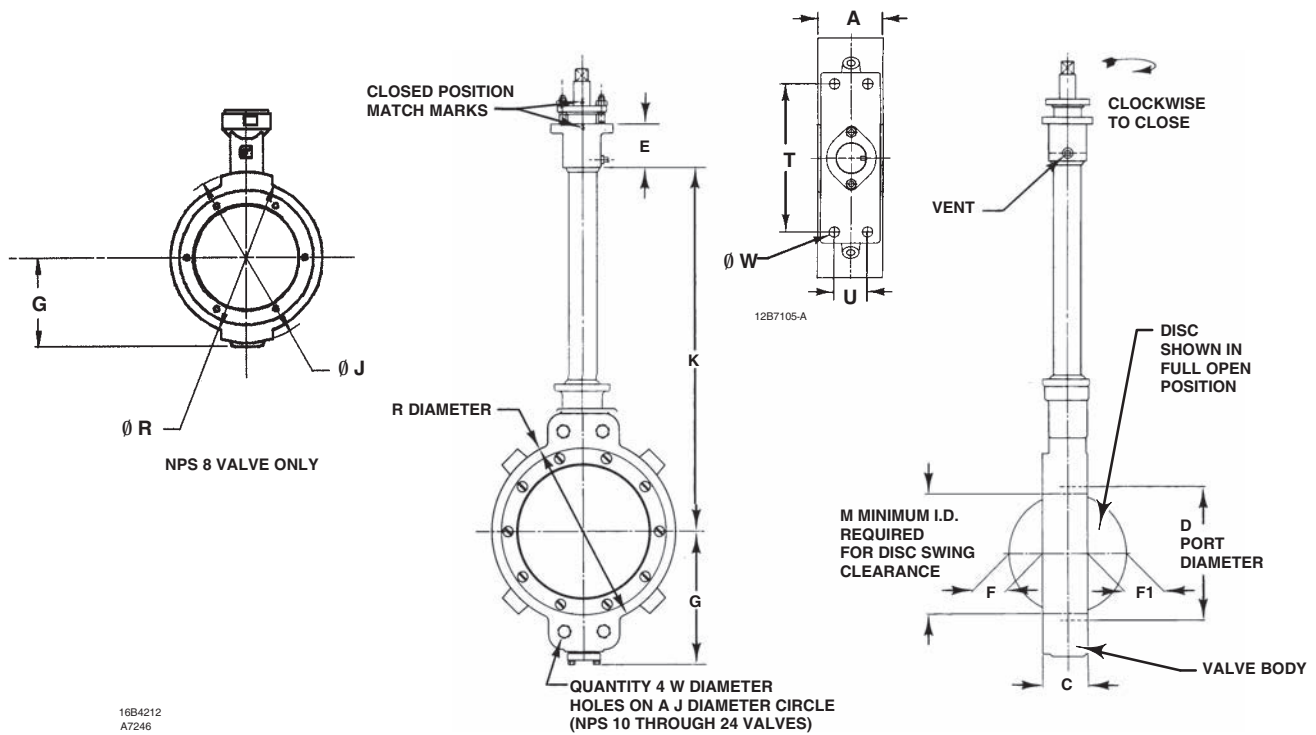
Dimensions, Wafer Style Valve, CL300, NPS 8 through 24 (also see table 9)
